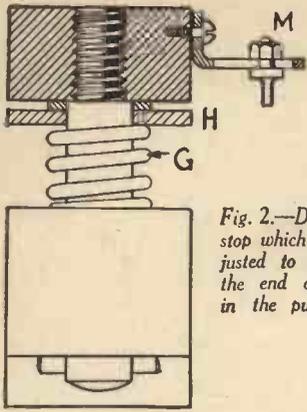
Details of the stop which can be adjusted to engage with the end of the hole in the punched strip.
